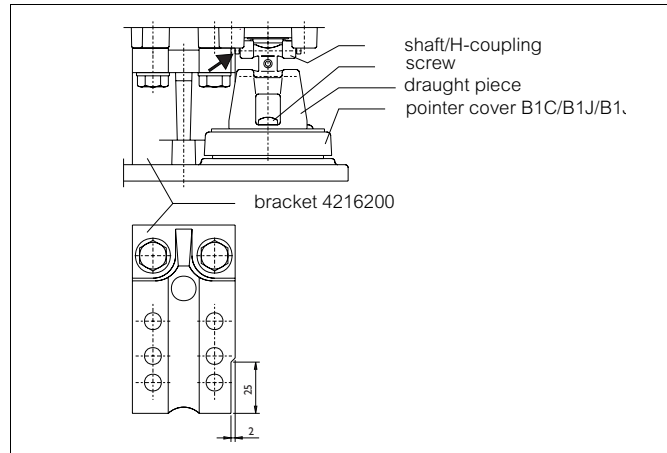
Installing NI700/S1 position transmitter on B series actuator (older version).
